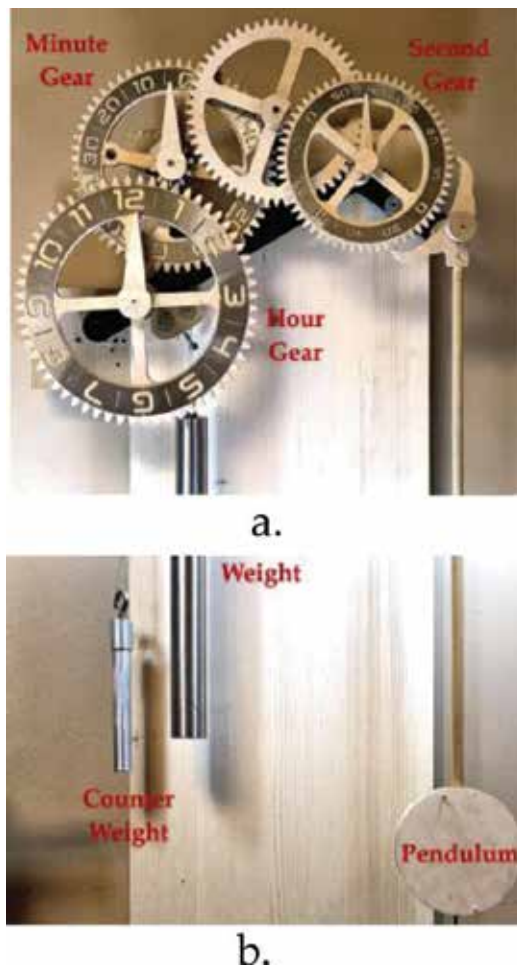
“Genesis” wood clock [12] (a) Top half (b) Lower half.
